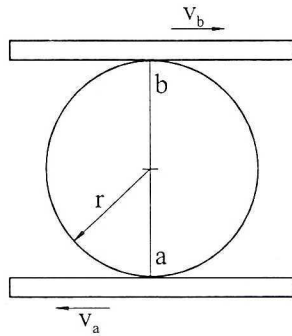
Forming pieces into spherical forms between two moving surfaces
